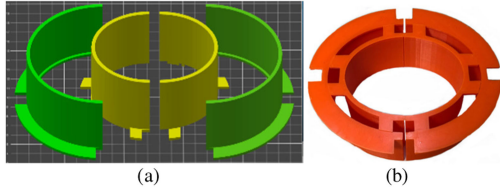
3-D printed bobbin. (a) 3-D model. (b) 3-D printed bobbin prototype.
